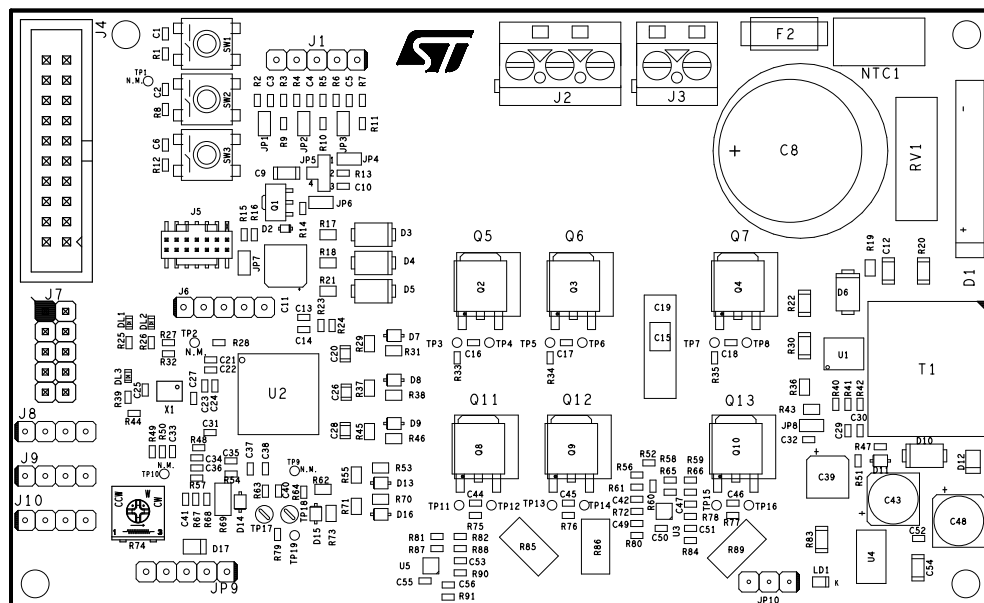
EVSPIN32G06Q1S3 layout - top layer
